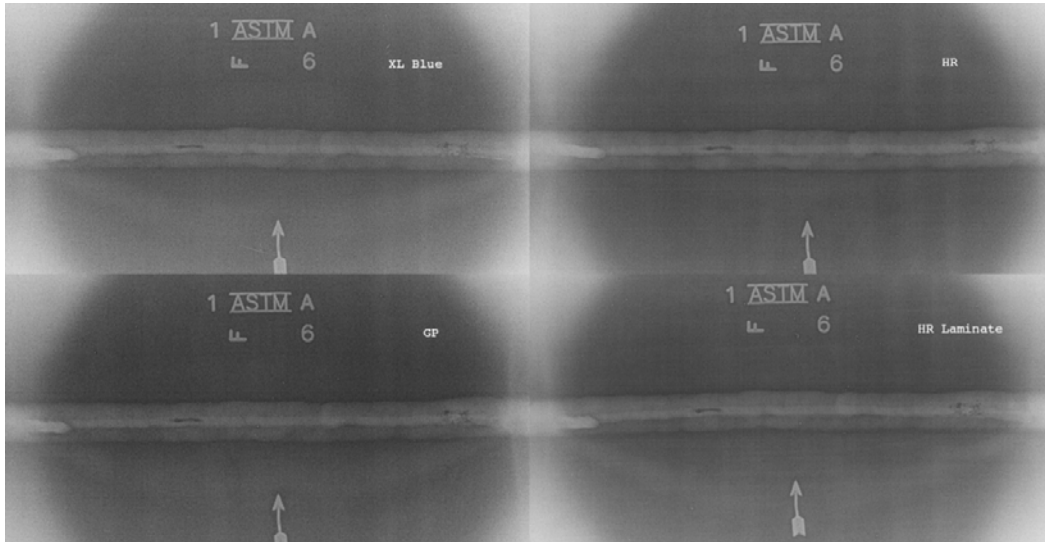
Four-Inch Schedule 80 Pipe Weld Radiograph with Iridium Exposure.
